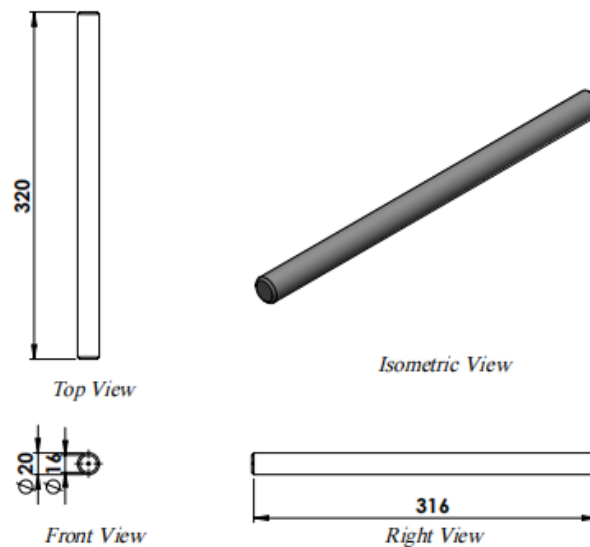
Two-dimensional shaft drawing for the onion slicing machine.
